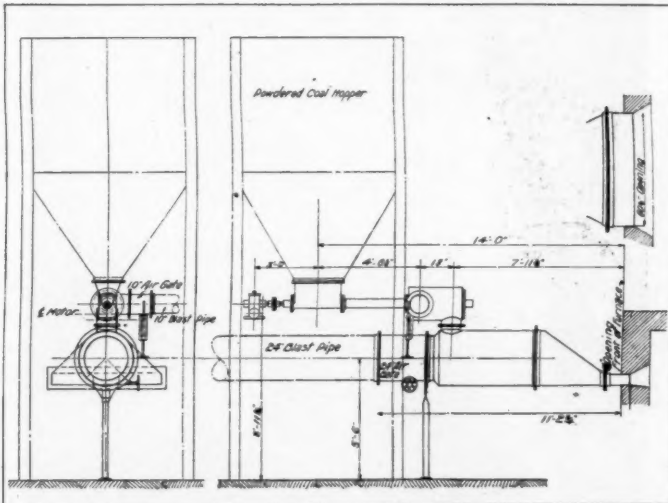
GENERAL ASSEMBLY OF BURNER FOR AIR MELTING FURNACE
